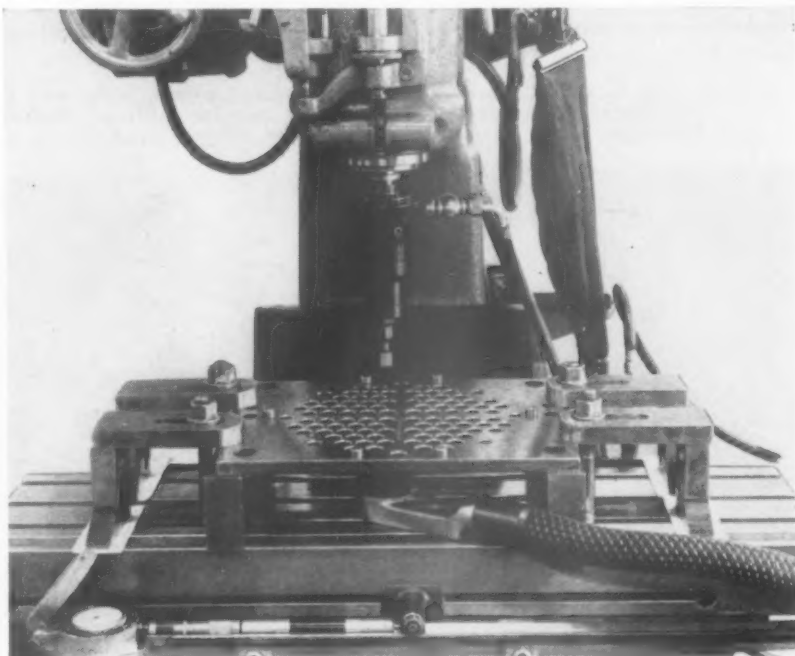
, showing an air-operated grinding attachment which, mounted in a milling machine spindle, permits precision jig grinding. A vacuum system keeps work and machine free of abrasive dust and grinding chips.
